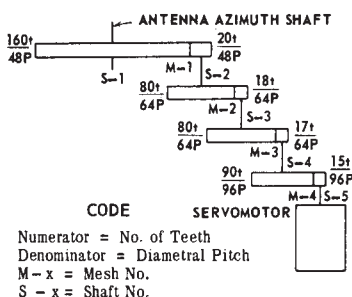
GEARING SCHEMATIC AND DESIGN DETAILS FOR A SMALL RADAR ANTENNA DRIVE GEAR TRAIN
